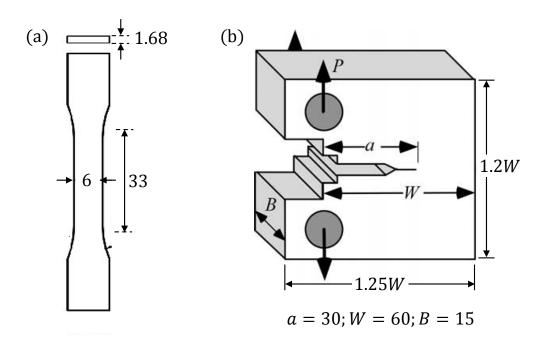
Specimens used to measure the material properties of the 3d printed polymer: (a) dogbone specimen for tensile tests and (b) CT sample for fracture toughness tests. All dimensions are in mm.
